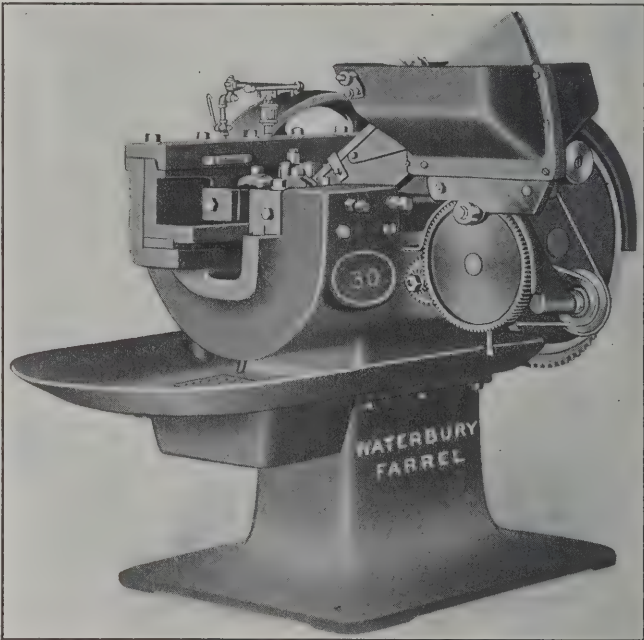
A Waterbury Farrel Foundry & Machine Co.'s Thread Rolling Machine with Automatic Hopper Mechanism
